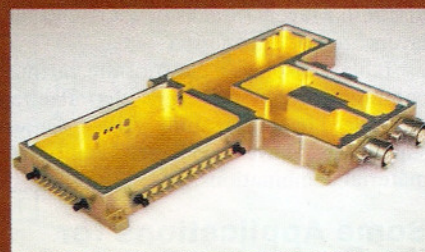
This aluminum electronics package features steel connectors in an all-welded construction.
